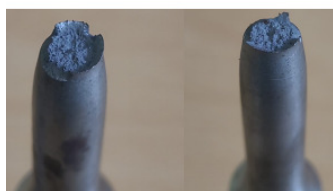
The fracture surface of C-45 after Tensile test
